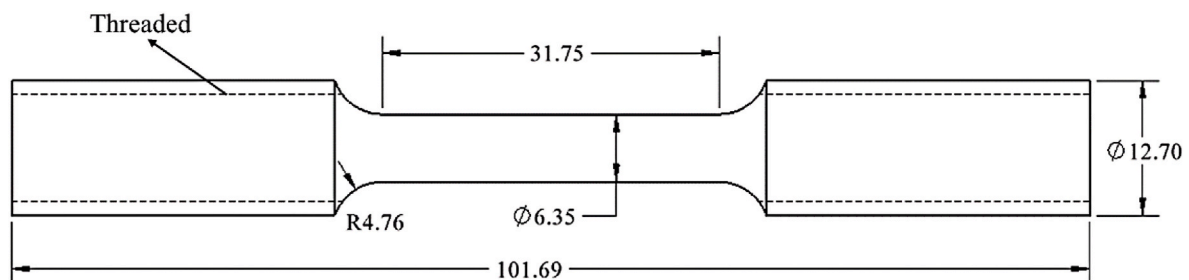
Drawing of the tensile specimen based on ASTM E8 [32] standard (all dimensions are in mm).
